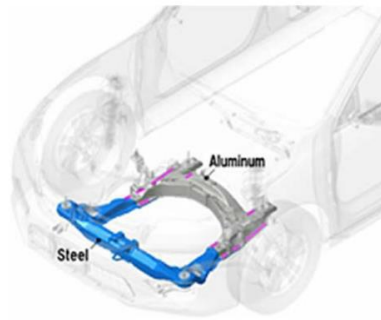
Aluminium-Steel Hybrid Sub frame Assembly in Automotive Chassis Friction Stir Spot Welding (FSSW) [28].
